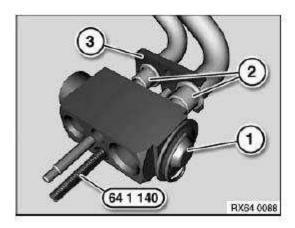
Identifying Retaining Plate With Special Tool (64 1 140) Courtesy of BMW OF NORTH AMERICA, INC.
